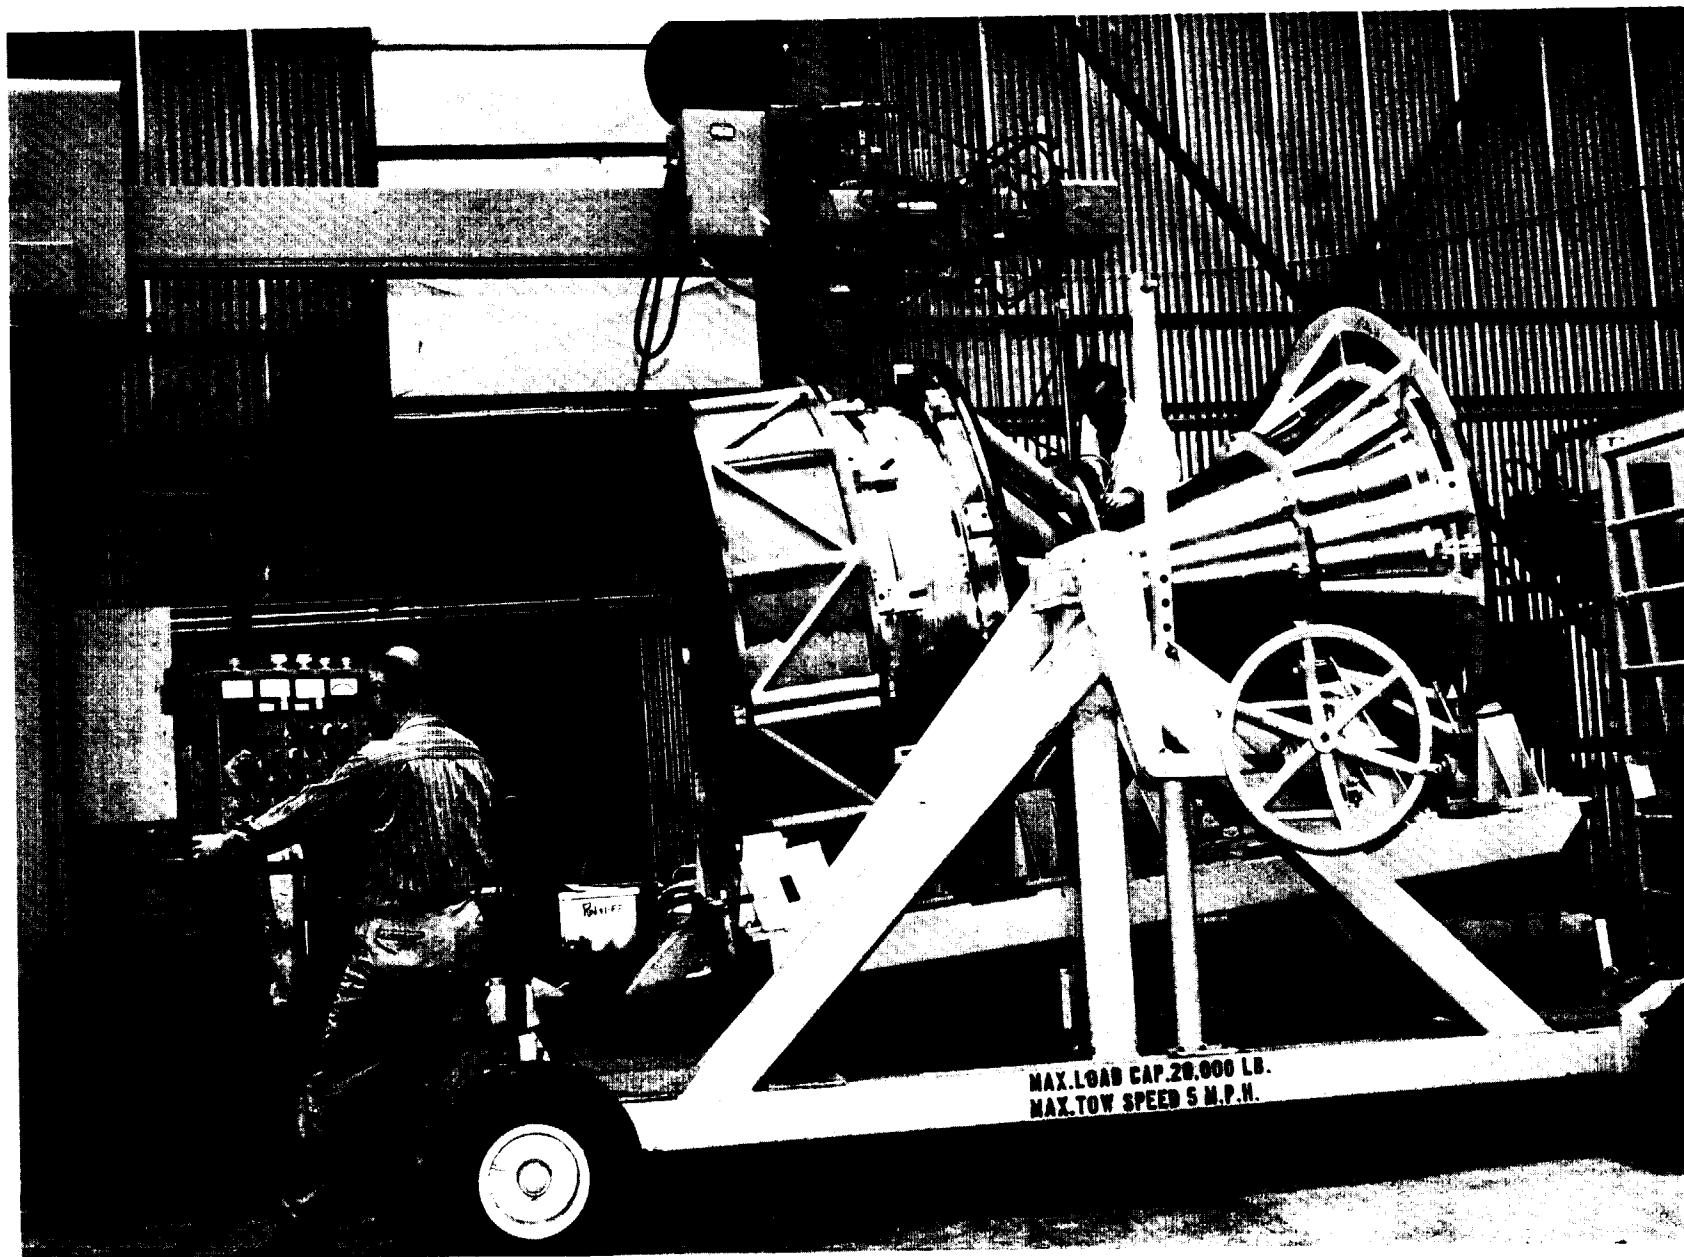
Welding Control Panel and Boom in Position
